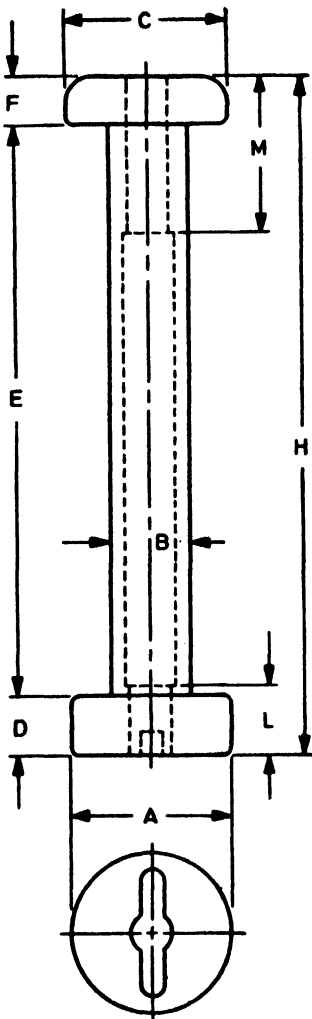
A TYPICAL DOUBLE FLANGED BOBBIN
